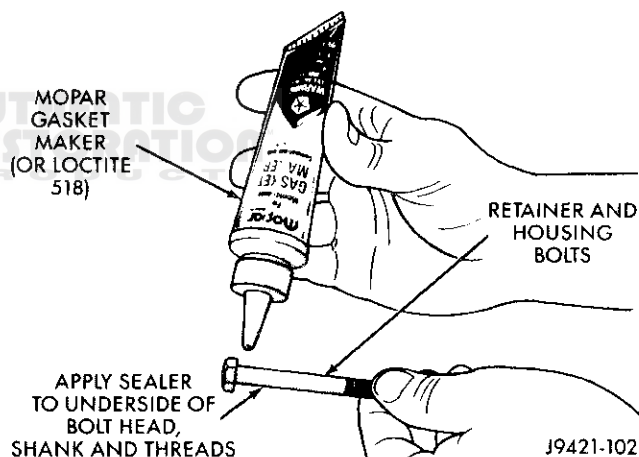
Applying Sealer To Retainer And Housing Bolts
